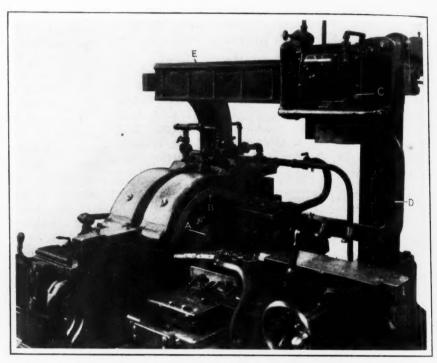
Automatic Center-drive Lathe in which the Main Bearings and the Flywheel and Stub Ends of Crankshafts are Turned and Faced
